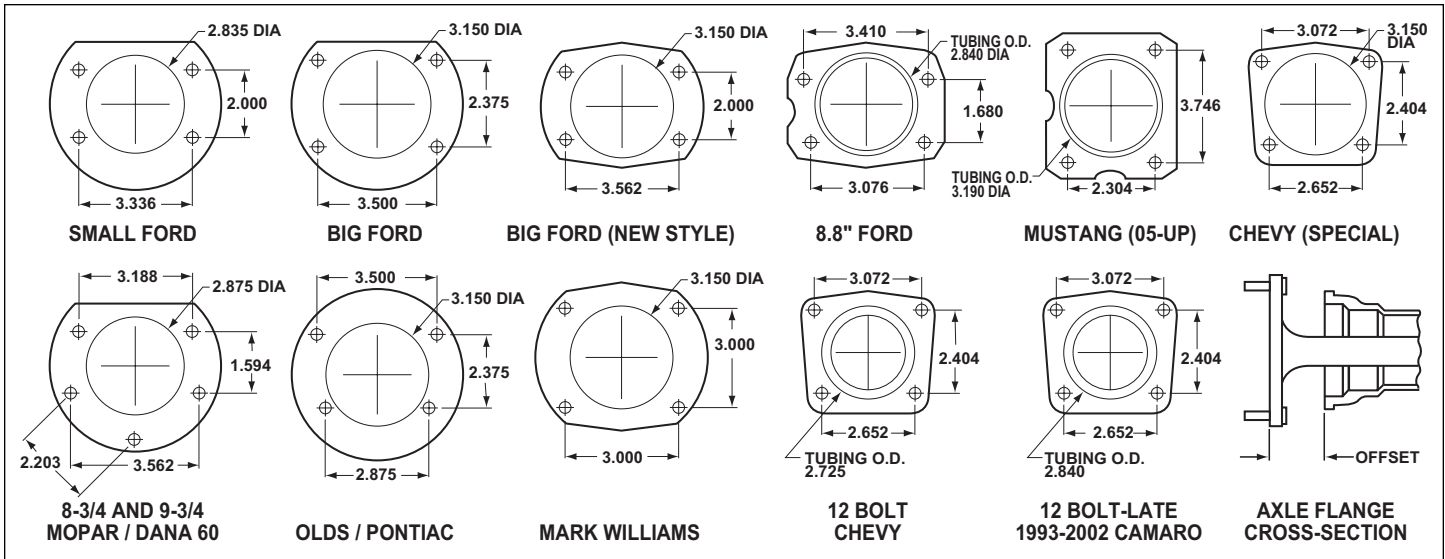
Rear Housing Flange Chart and Axle Flange / Offset Cross-Section
